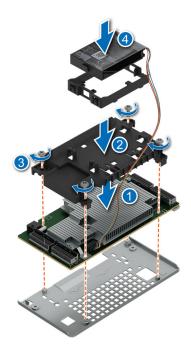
Installing the rear mounting front PERC module on the PERC tray
